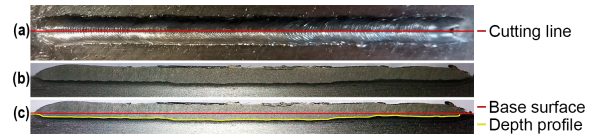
Weld bead depth obtained using image processing algorithms: (a) Longitudinal cut of the weld bead; (b) Polished piece; (c) Bead depth profile and the base surface
